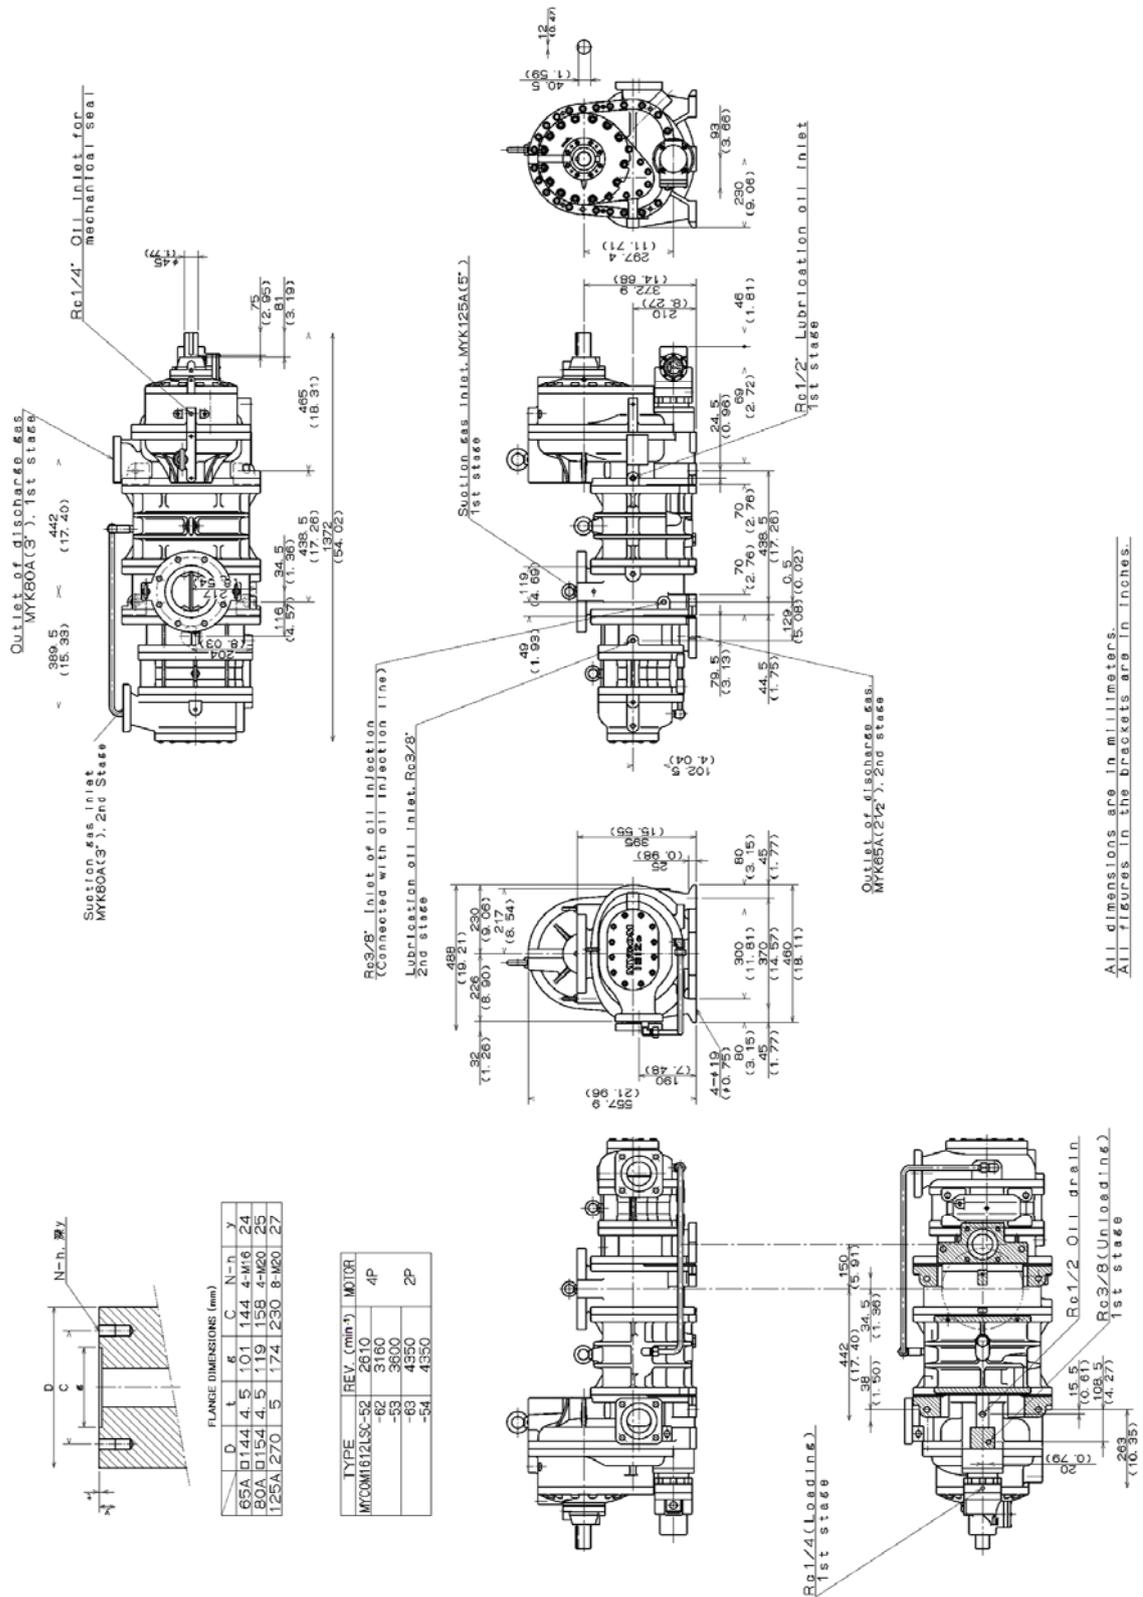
1612LSC Speed Increaser Type Outer Dimensions
